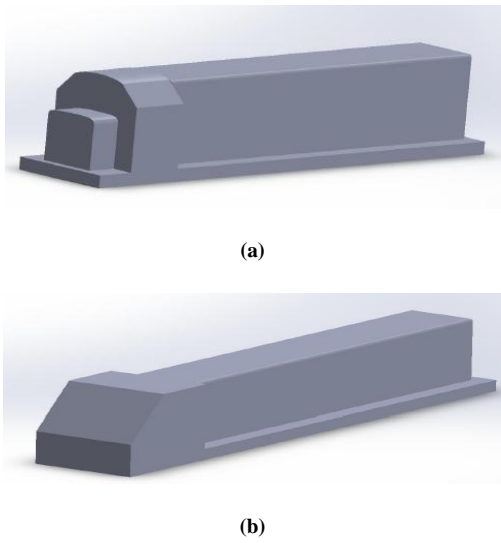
CAD Drawing of a) CC210 and b) CC203 Locomotives
